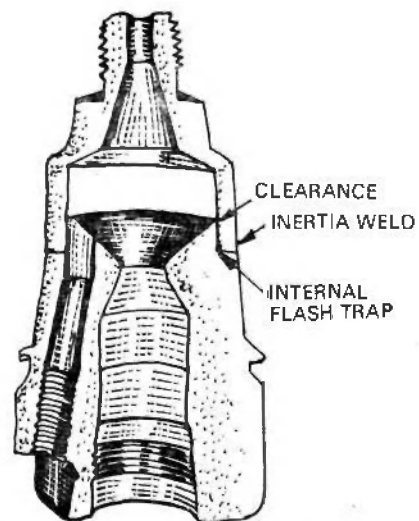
Precombustion Chamber for diesel engines produced by inertia welding. The original design was to have a press fit followed by copper bracing. The inertia welded joints were much stronger and the joint was simplified by eliminating the press fit. An internal flash trap was provided to ensure a clean inside surface
